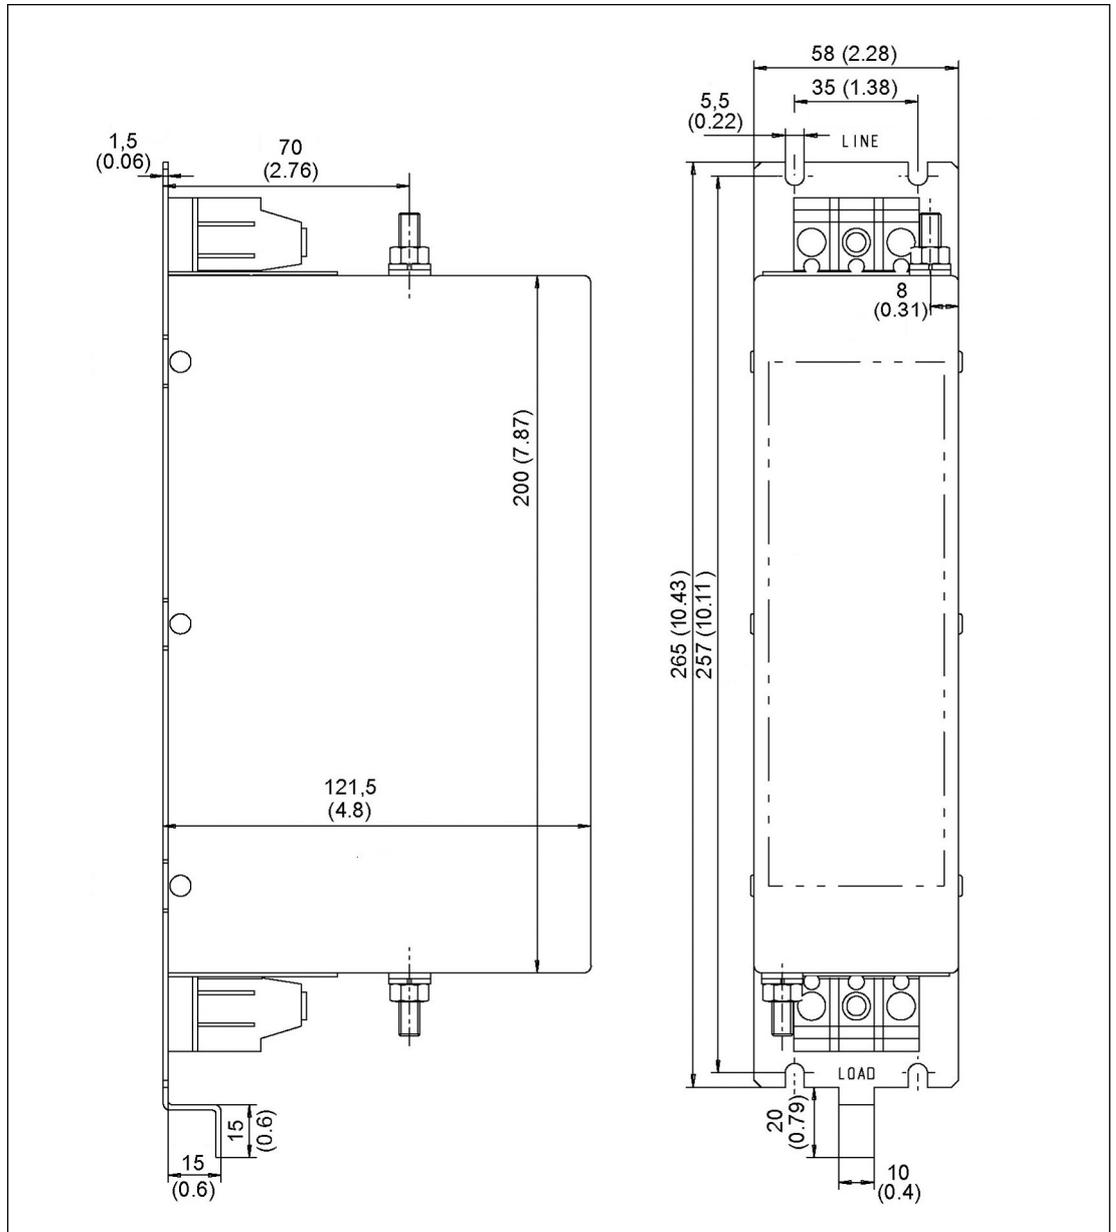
Dimension drawing of Basic Line Filter for Smart Line Modules 5 and 10 kW, all dimensions in mm and (inches)
